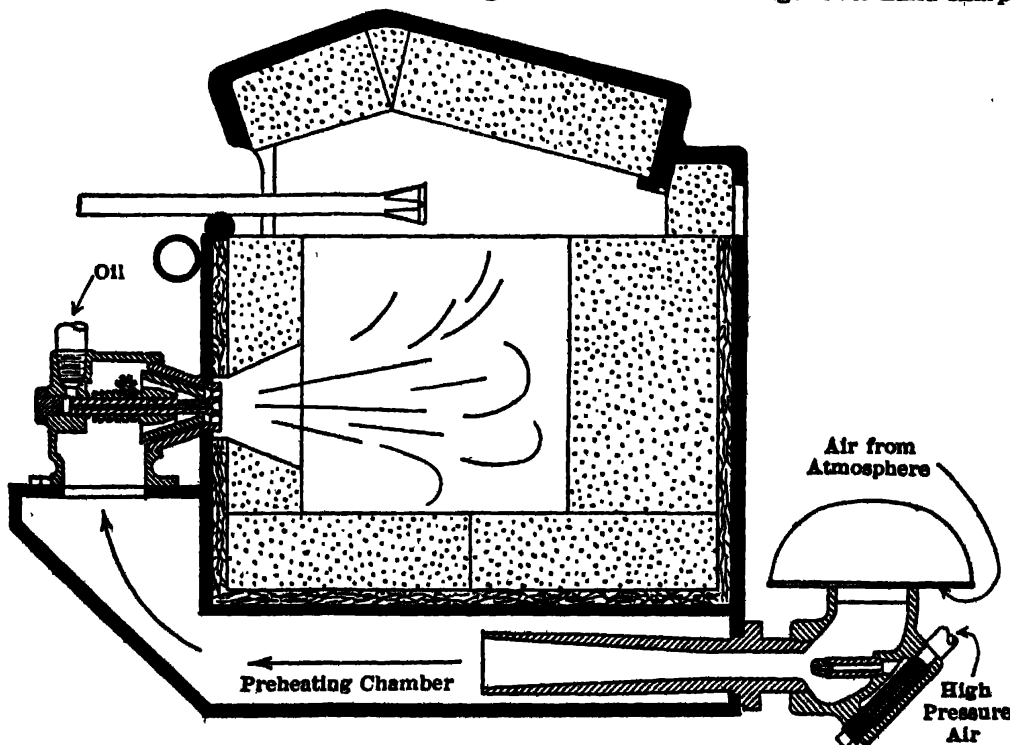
Ingersoll-Rand Oil-fired Furnace for Heating Drill Steel
